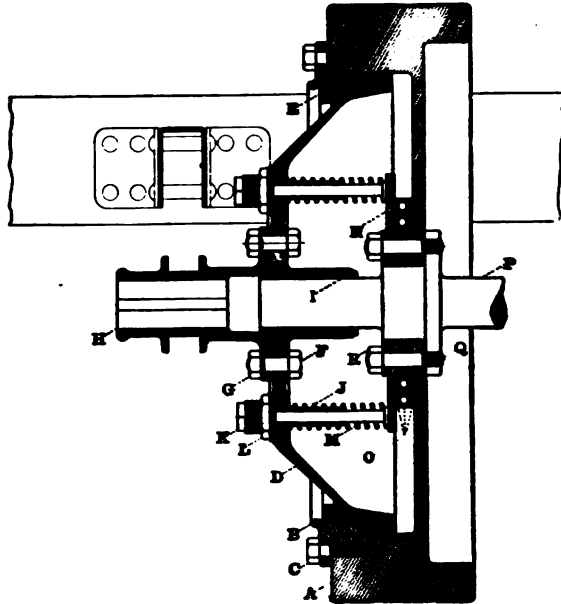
Detail Section of the Pope-Toledo Clutch. The parts are: A, fly-wheel; B, clutch ring; C, clutch ring screw; D, clutch cone; E, clutch leather; F, clutch bolt; G, clutch bolt nut; H, clutch sleeve; I, clutch sleeve bush; J, clutch spring; K, clutch spring plug; L, clutch spring plug nut; M, clutch spring stem; N, clutch spring plate; O, ball thrust collar; P, crank shaft; Q, fly-wheel stud; R, fly-wheel stud nut.
